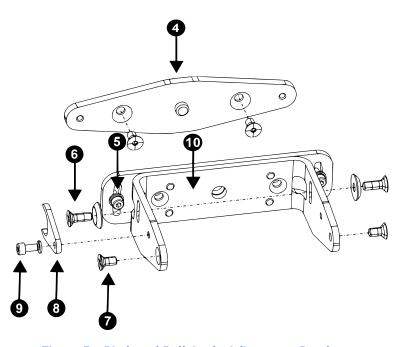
Pitch and Roll Angle Adjustment Bracket
